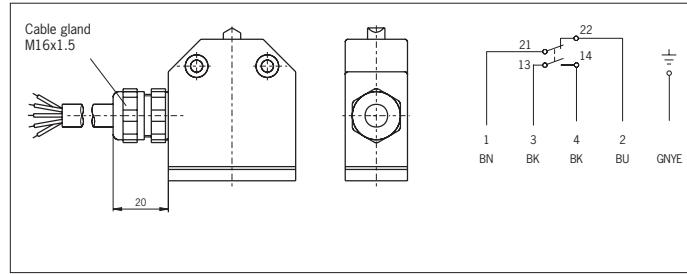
Dimension drawing/connection diagram for SN01.558X... with connecting cable (PUR cable, 5x0.5 mm<sup>2</sup>)
